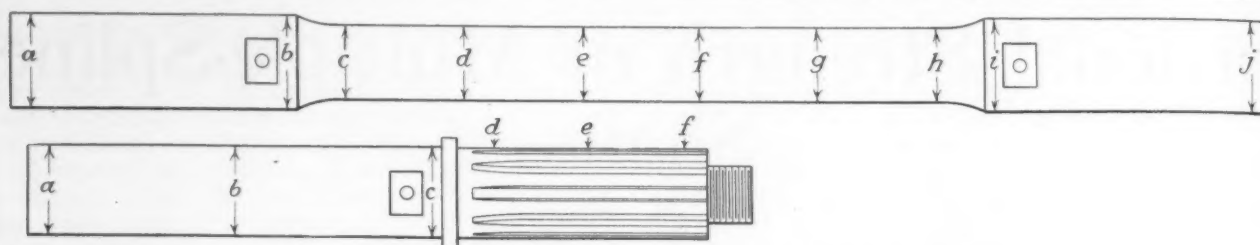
DIAMETERS OF TORSION-TEST SHAFTS
